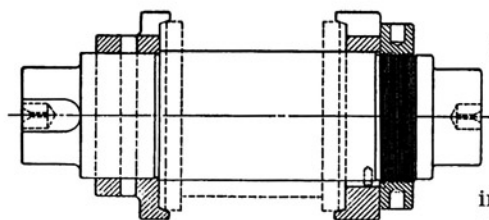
Mandrel on which Bearing is held for Turning Operation
